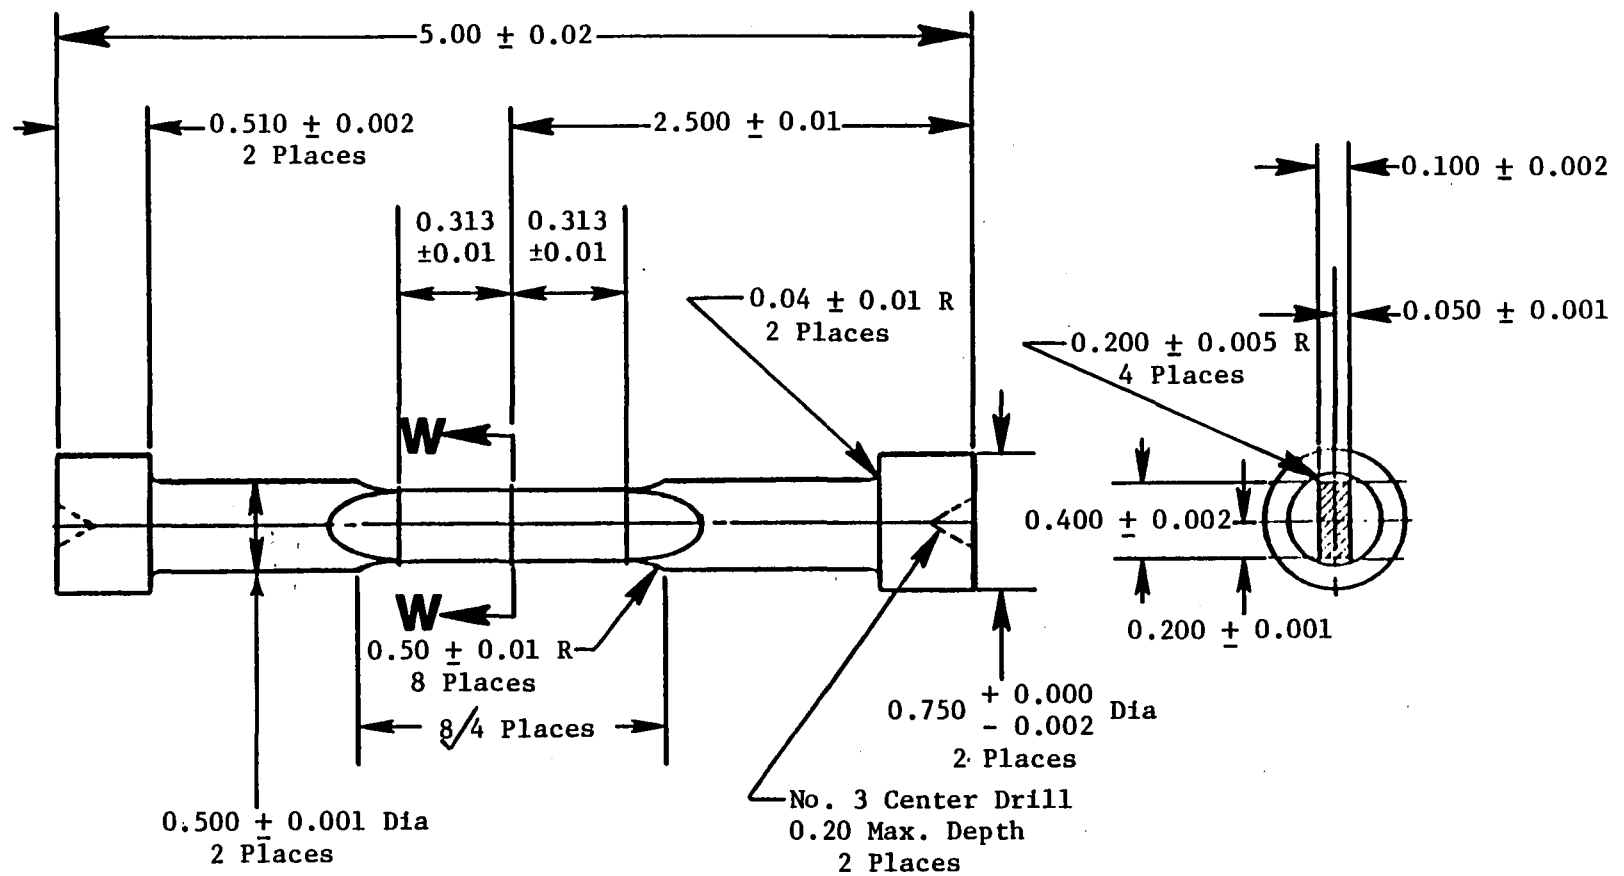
Buttonhead Single Edge Notch (SEN) Specimen.
